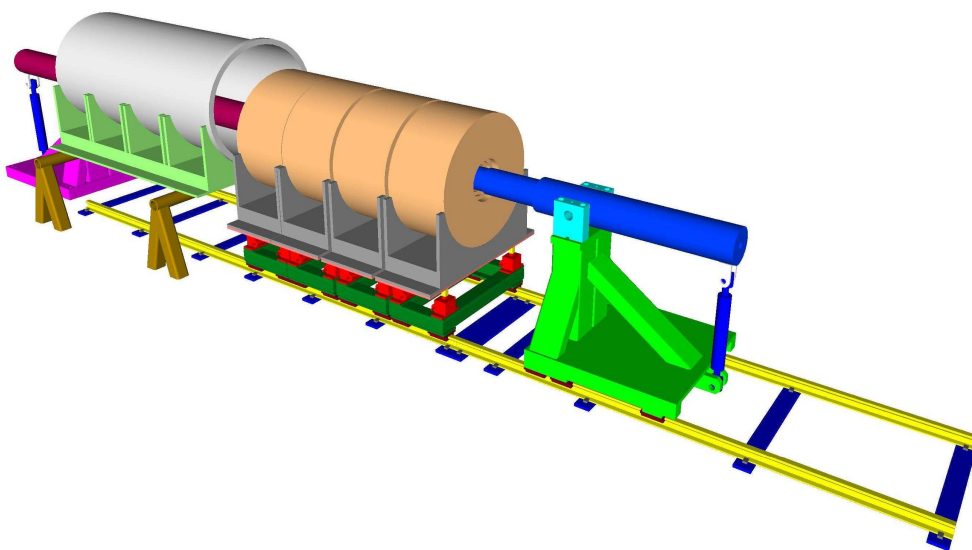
Final Assembly tooling. From left to right are the mandrel extension, the mandrel extension support, the FCal support tube, its cradle, its temporary frame, the rails, FCal1 on its cradle and cart, FCal2 on its cradle and cart, FCal3 on its cradle and cart, plug3 on its cradle and cart, the mandrel, and the mandrel support.
